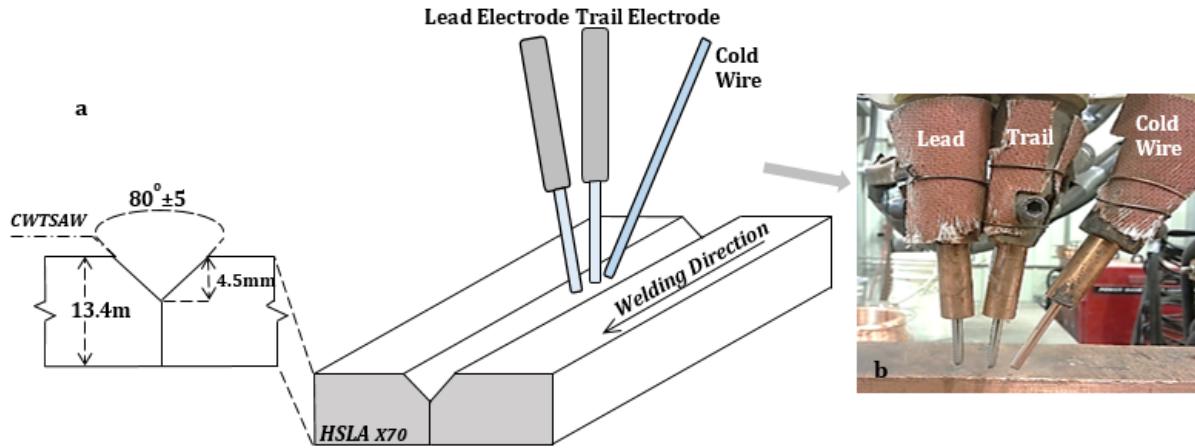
CWTSAW process setup: (a) Geometry of the steel plate along with the positioning of the electrodes and cold wire and (b) welding setup.
